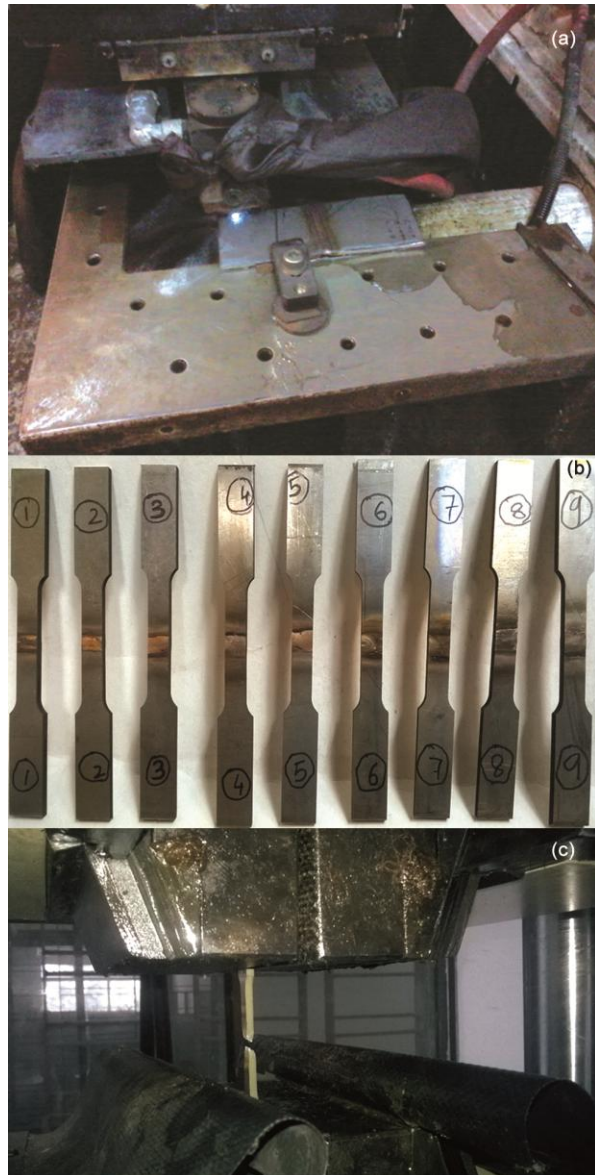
(a) Tensile specimen, (b) tensile test specimens, and (c) tensile sample after test.
